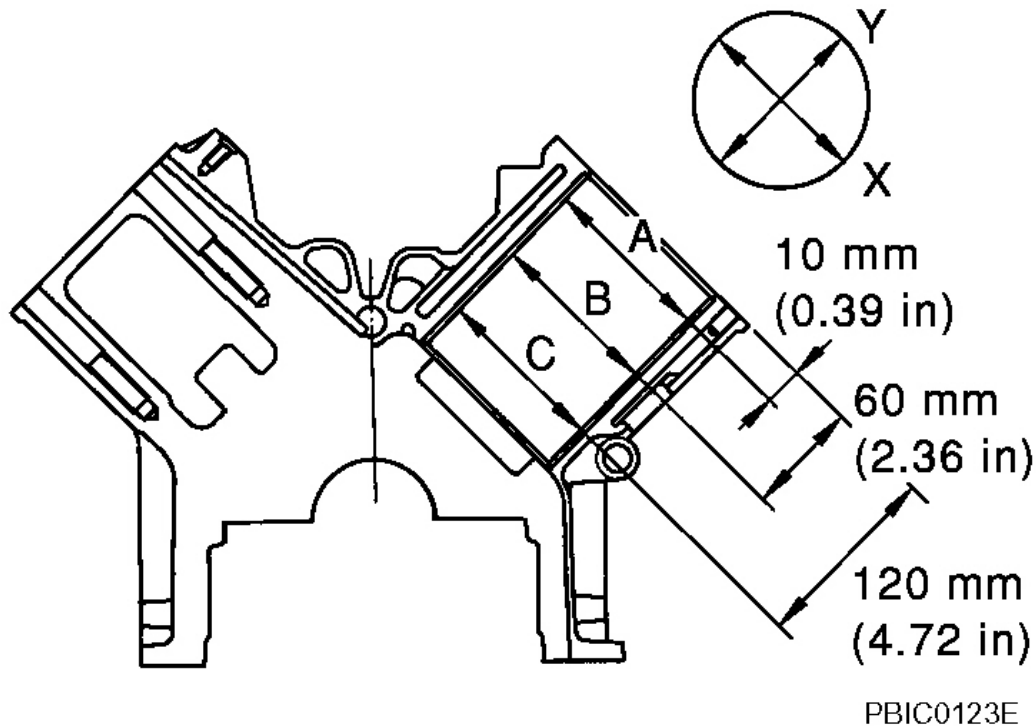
Measuring Cylinder Bore For Wear, Out-Of-Round And Taper By Using Bore Gauge
